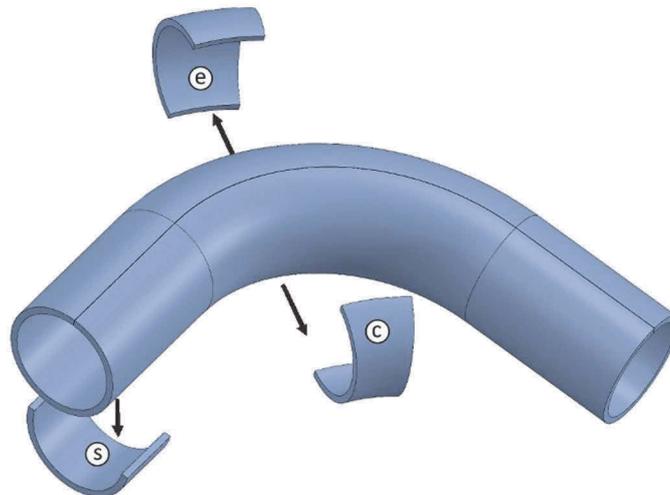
Locations of tube bend zones from which samples were collected for material testing:
